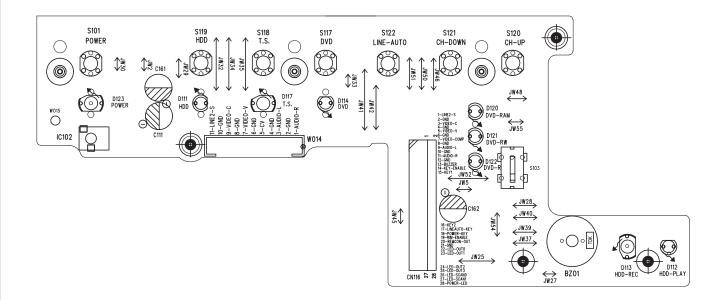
EU03B Front (L) PC Board (Top side)
